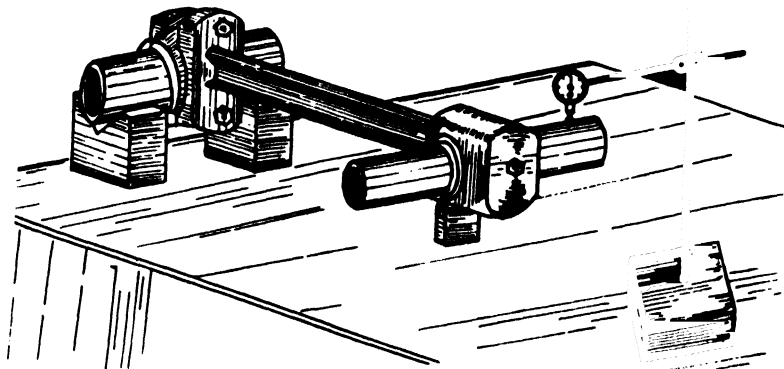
A method commonly used to check the parallelism of the bearing bores relative to each other.
